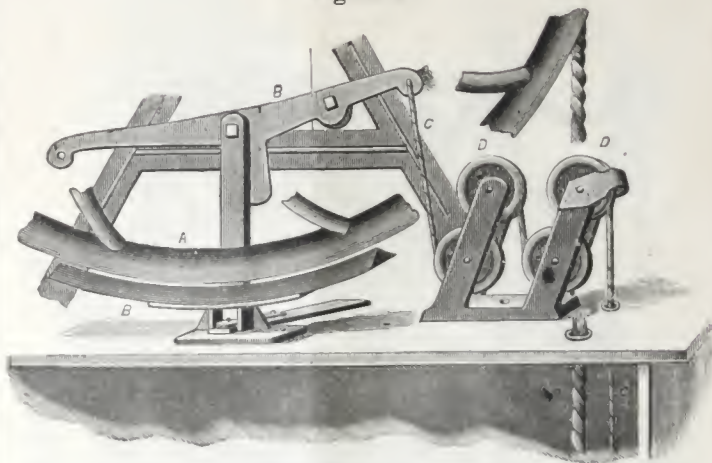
shows more plainly the brake attachment; B, shows the lever and hard-wood shoe attached, and the manner in which it is bolted to frame of fixtures; C, C, shows the brake cord passing up through shelf and over the friction wheels D, D, and fastened to brake lever. For brake cord use 3-8 cotton rope. We will furnish these fixtures fastened to a 1 1-2 inch shelf, to exactly fit top of well hole, at an extra cost of from \$2.50 to \$4.00 net, according to size. In ordering state size of the well hole, inside measurement. These fixtures can be used in any well hole, from thirty inches to four feet wide.
